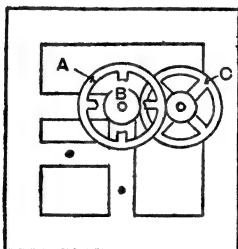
Front of Plain Drum Clock, showing Required Wheels
